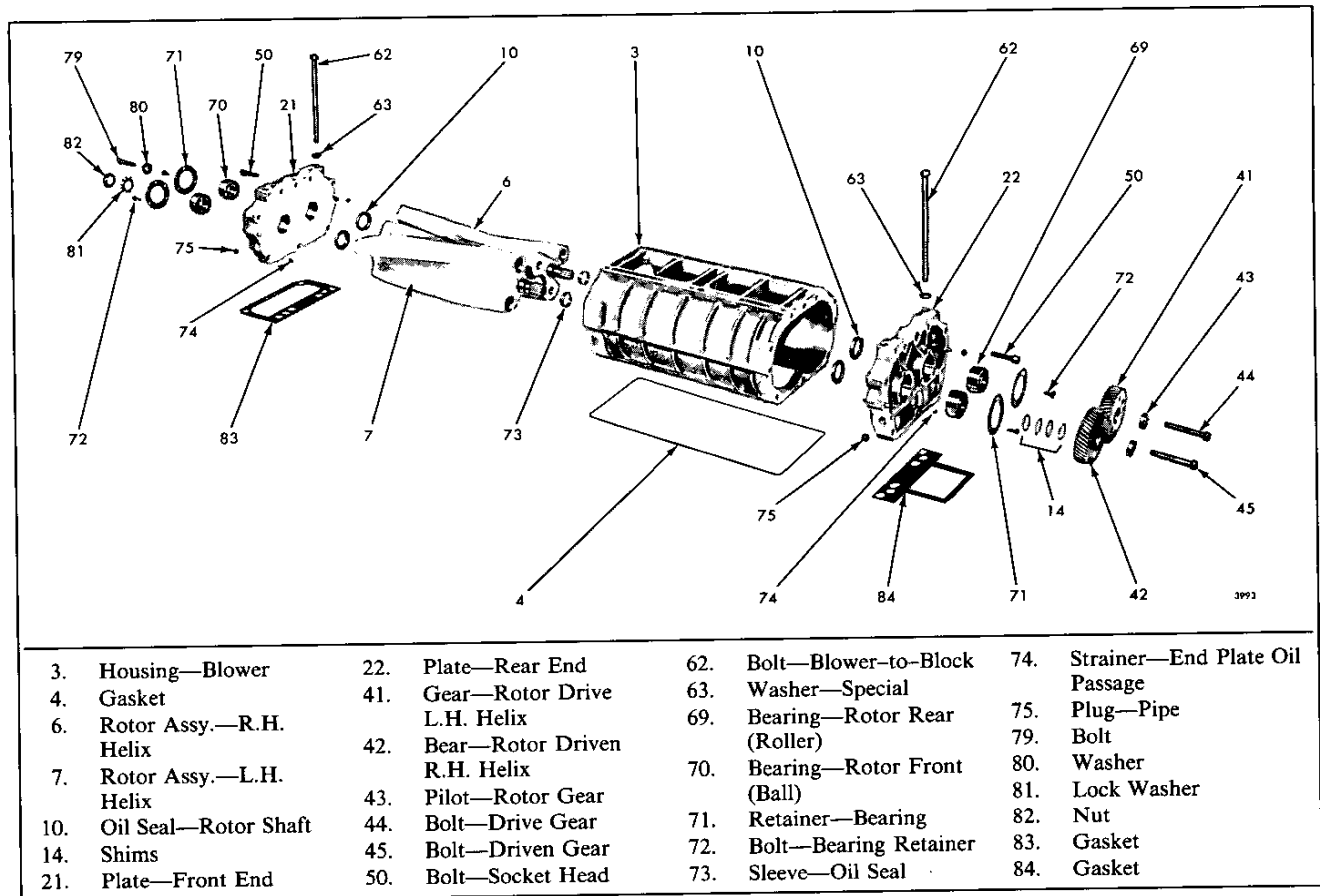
Blower Details and Relative Location of Parts (8V-53) (Former Blower)
